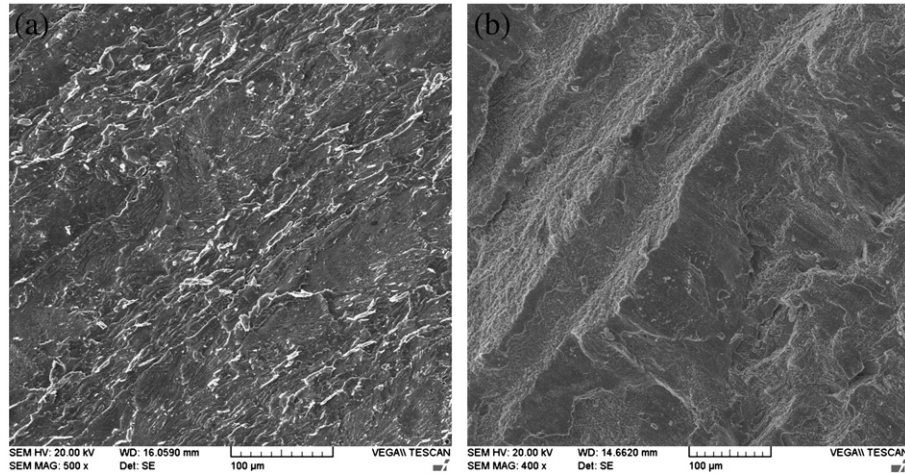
Fracture morphology of Ti-6Al-4V brazed joints at 950 °C-1200 s (STEMET 1228) and 990 °C-1200 s (STEMET 1409).
